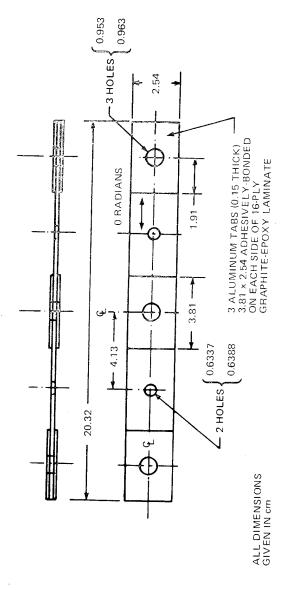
TEST SPECIMEN AND SET-UP FOR TENSION-THROUGH-THE-HOLE FAILURE MODE
